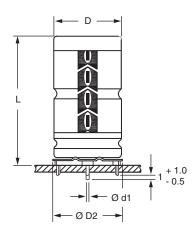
Mounting hole diagram and outline; Form MR: With mounting ring and pins
